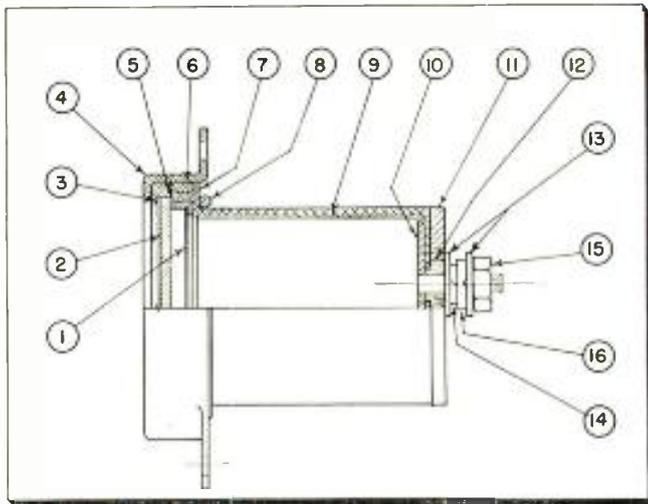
Case and flange clamp assembly: 1. "L" retaining ring 2. crystal 3. gasket 4. flange clamp 5. sealing ring 6. bezel 7. case 8. "O" ring 9. insulating sleeve 10. filler plate 11. retaining plate 12. bushing 13. washer 14. lock washer 15. hex terminal nut 16. split nut
